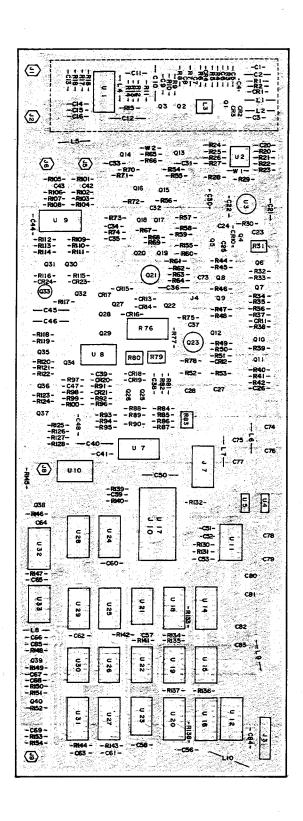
A4 Fractional N Loop Board Assembly Component Locations.
